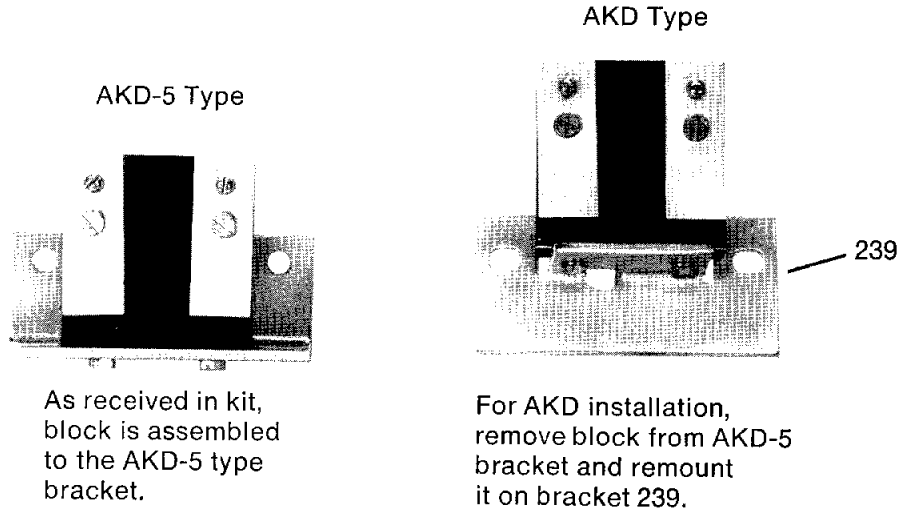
4th-wire disconnects for AK/AKR-75/100 drawout breakers
